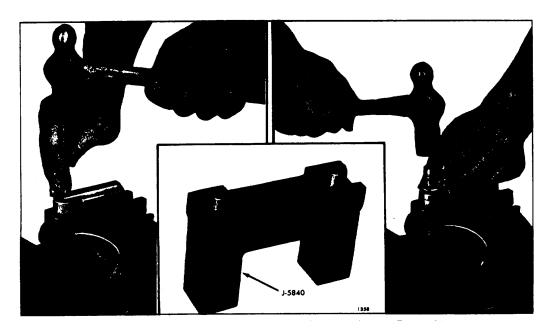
Removing or Installing Cam Follower Roller and Pin with Tool J 5840
